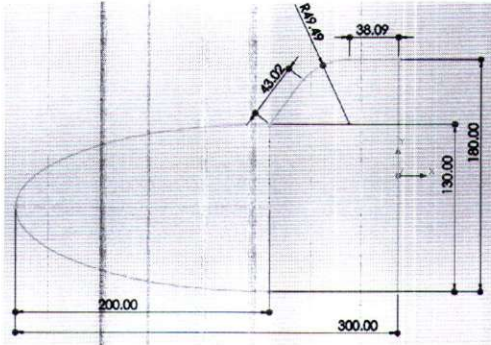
The side view measurement of FT Guinea Pig nose cone in millimeter
